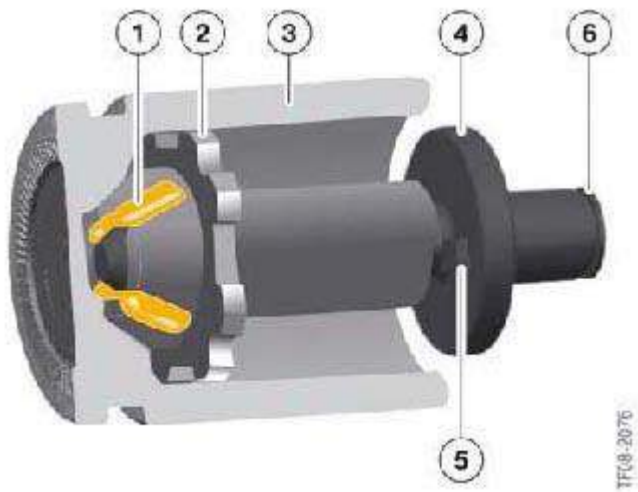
Identifying F10 Spindle And Spindle Nut In Brake Piston
